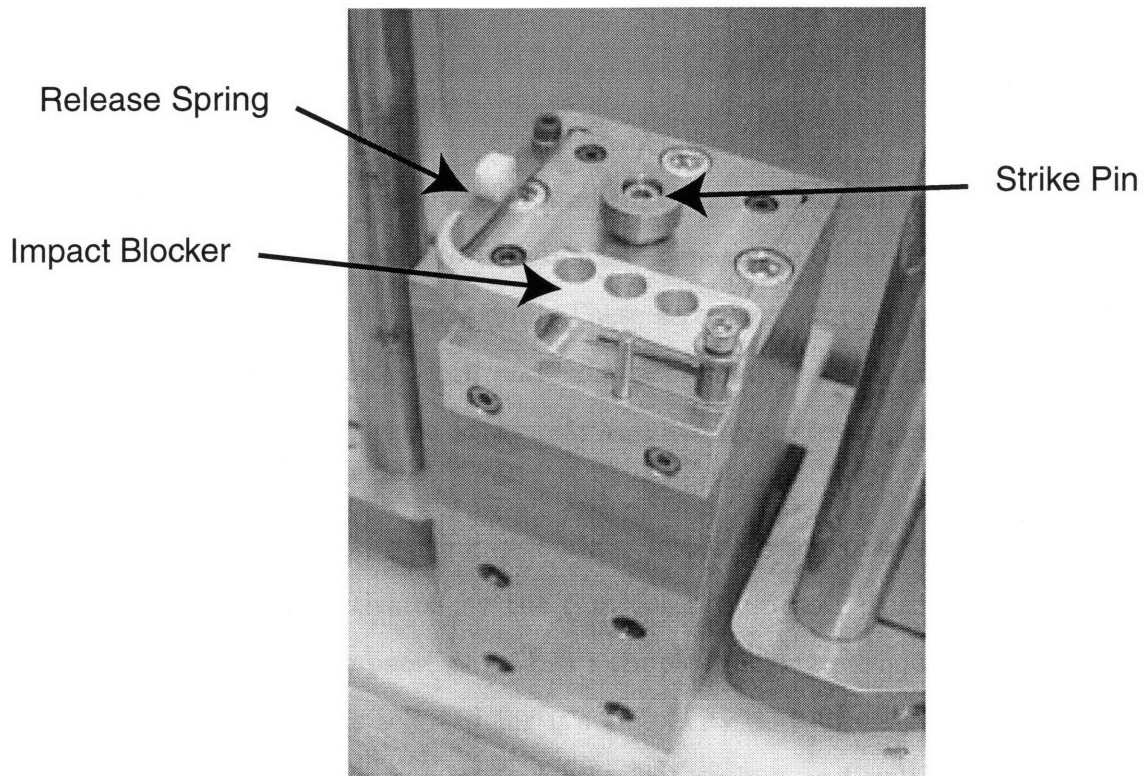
The anvil assembly is composed of two solid blocks of stainless steel that house the sample and the array punch. A spring loaded strike pin protrudes from the top block. This strike pin transfers the impact of the falling sled to the array die.
